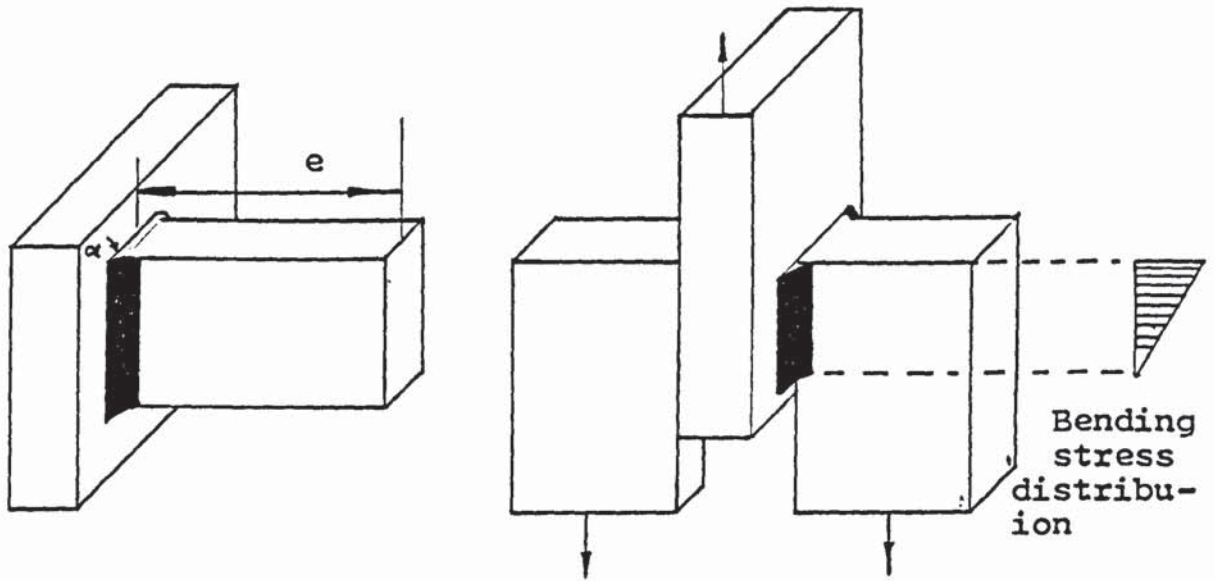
Welded connection with plate bearing considered by Commission XV
